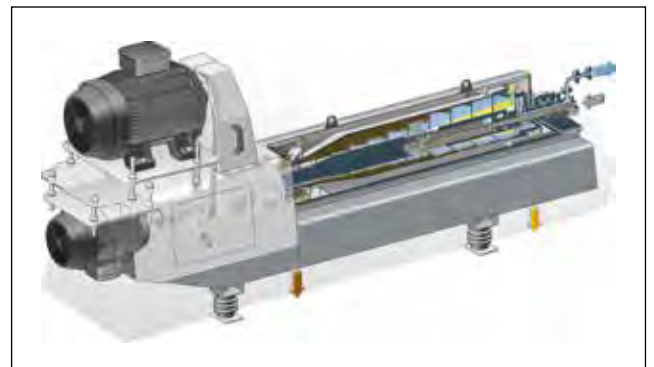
The decanter gearbox is located outside the product room to ensure easy-to-clean outer surfaces.
